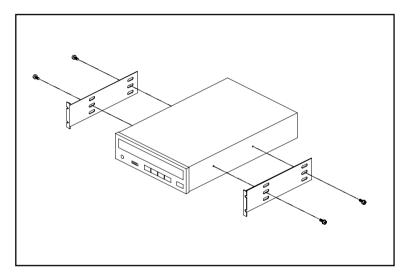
Attaching mounting brackets to a half-height device for mounting in device space next to the fan tray module
